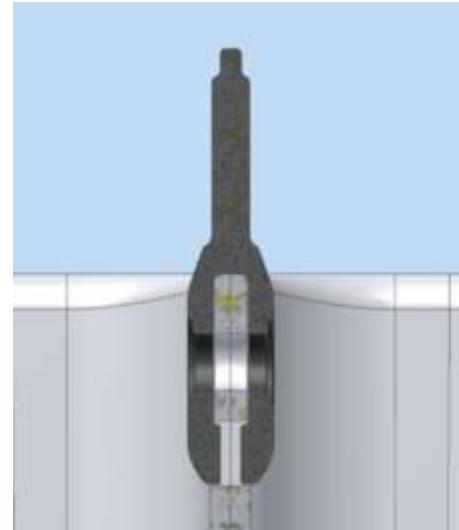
Positioning of the replacement handle Fig. 64: Replacement handle locked in place
